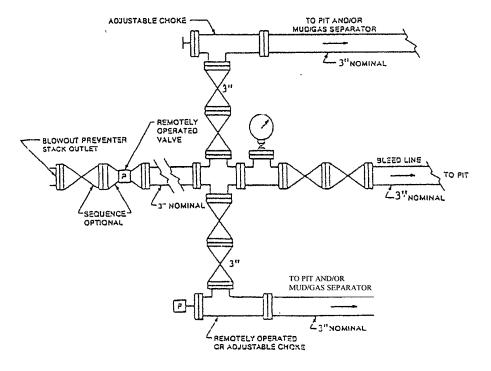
Typical choke manifold assembly for 5M rated working pressure service – surface installation
